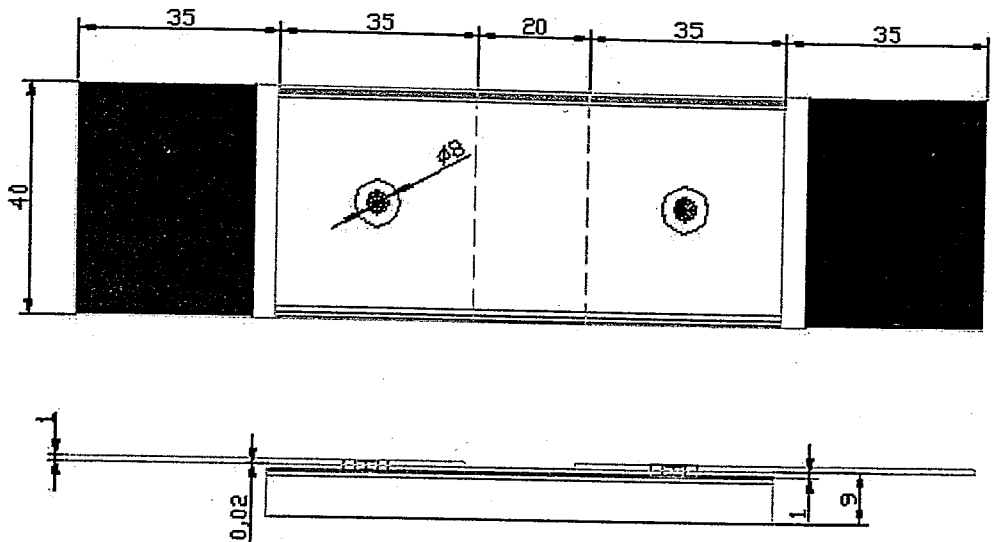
Geometry of modified tensile shear (MTS) specimen (top and side view)
